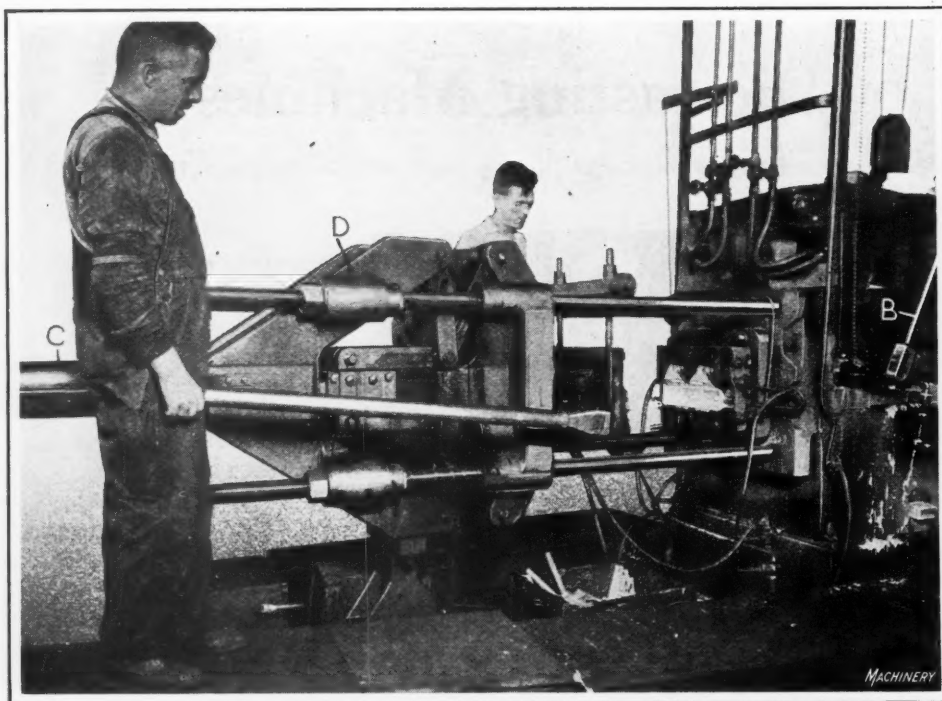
Using Gooseneck Die-casting Machine for Large Castings
